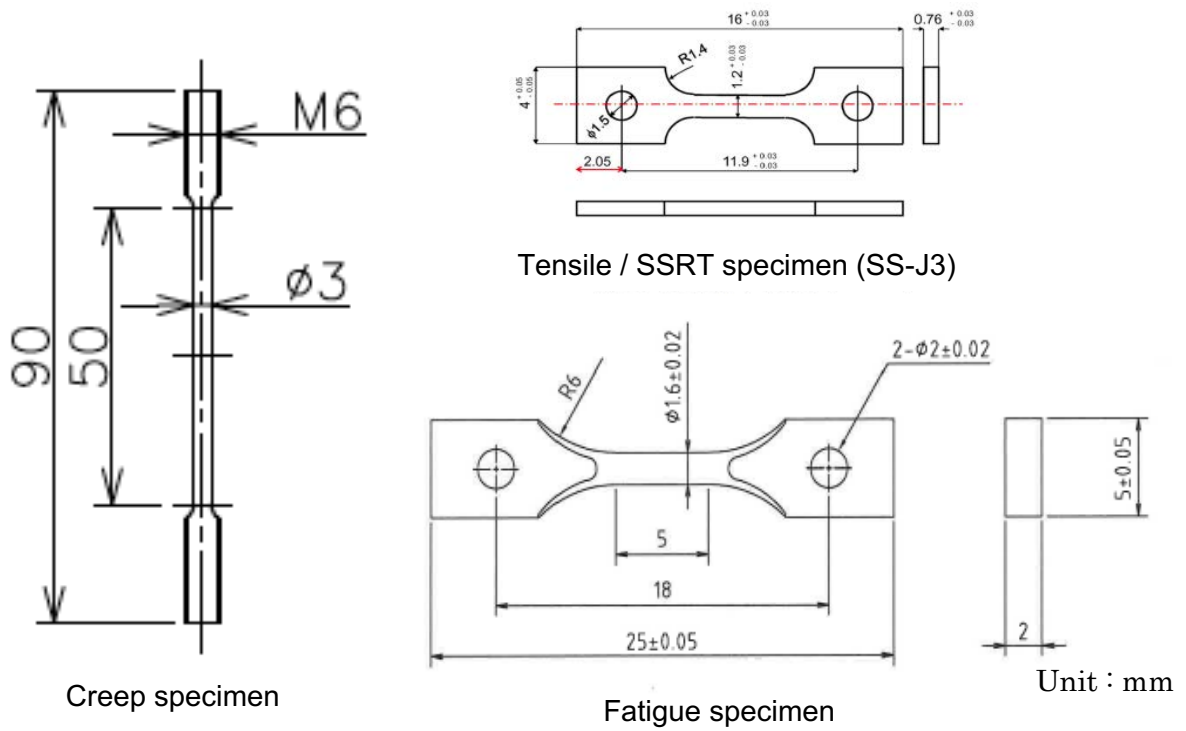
Drawing of the specimens for creep, tensile/SSRT and fatigue tests.
